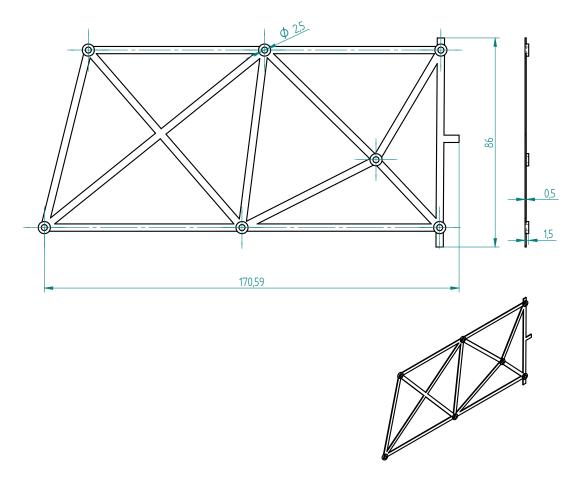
Drawing of the  ${\bf drillator}$  part
